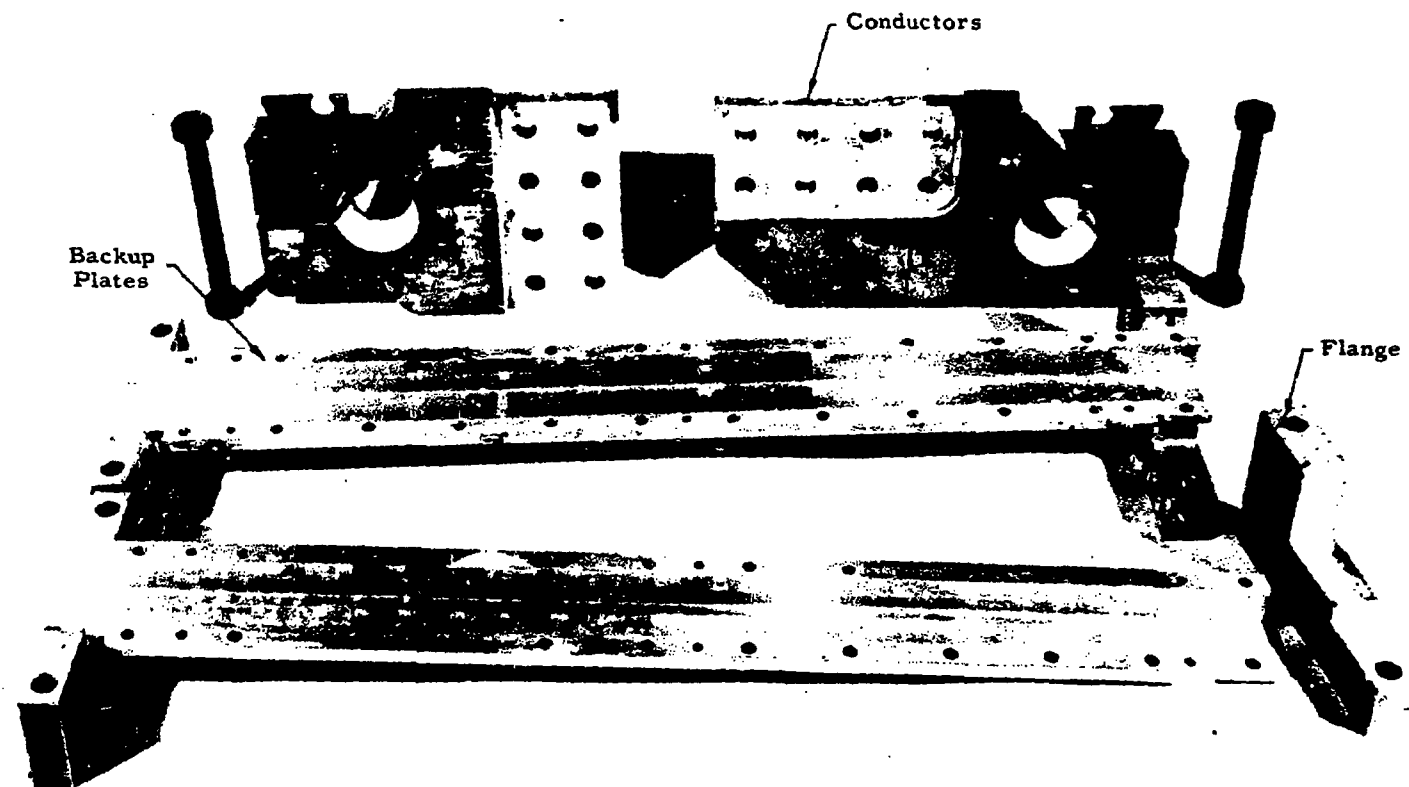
Burnout Test Specimen With Backup Plates and Flanges
